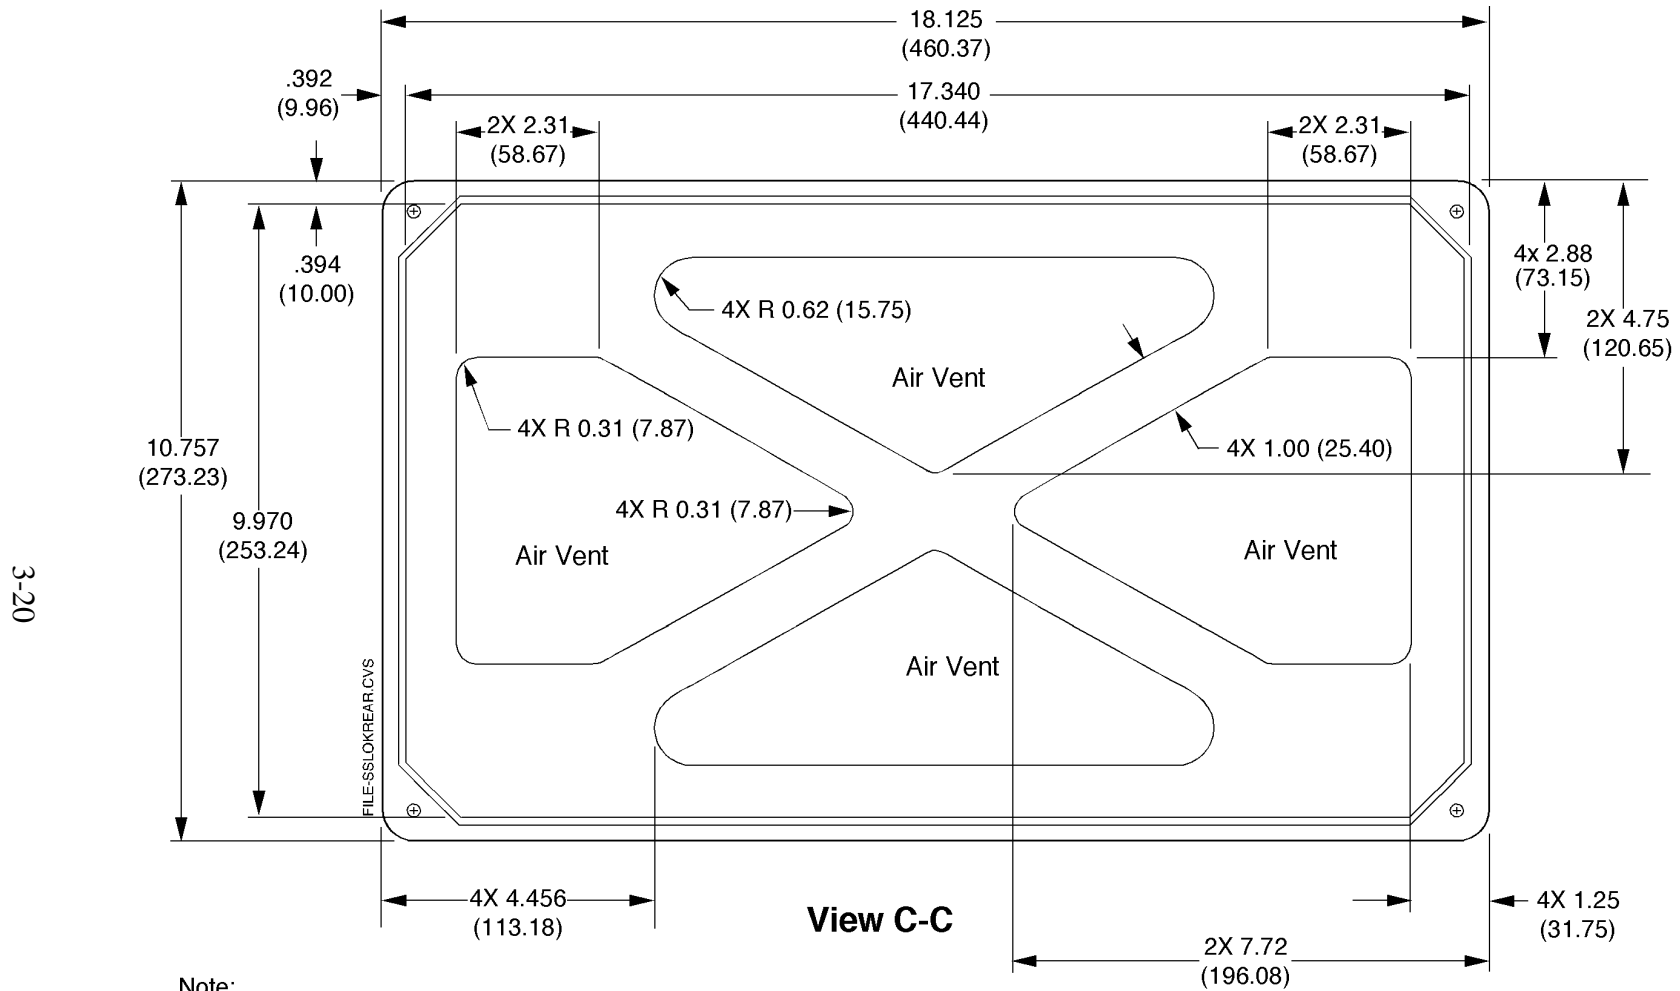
A ISS SINGLE LOCKER REAR PLATE ASSEMBLY (Sheet 3 of 5)
